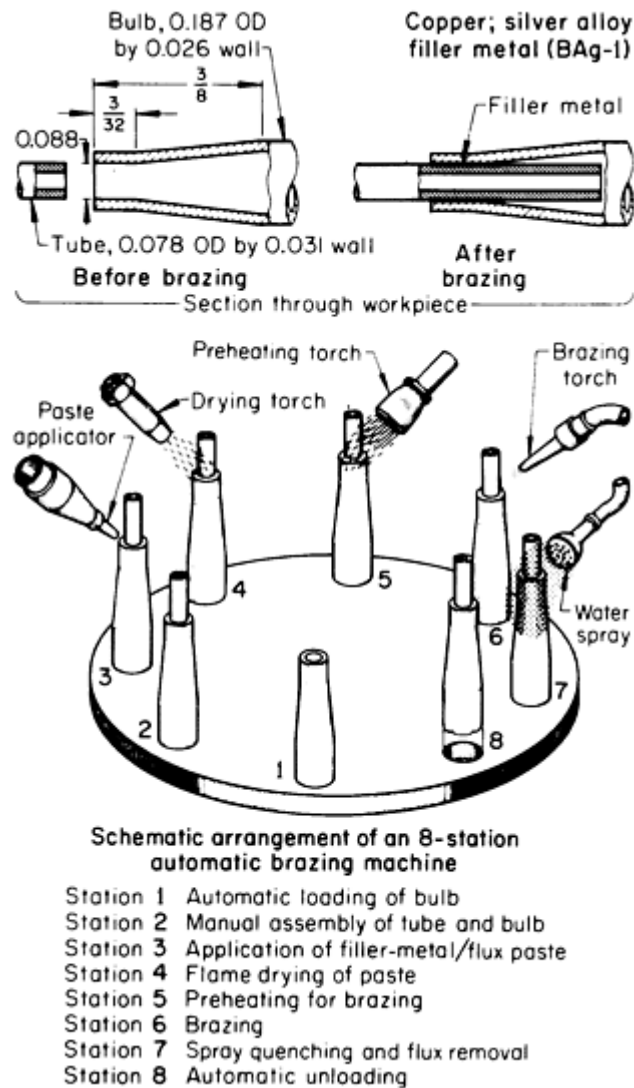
BULB AND TUBE ASSEMBLY, BRAZED BY MECHANICALLY HELD TORCHES ON AN EIGHT-STATION TURNTABLE
